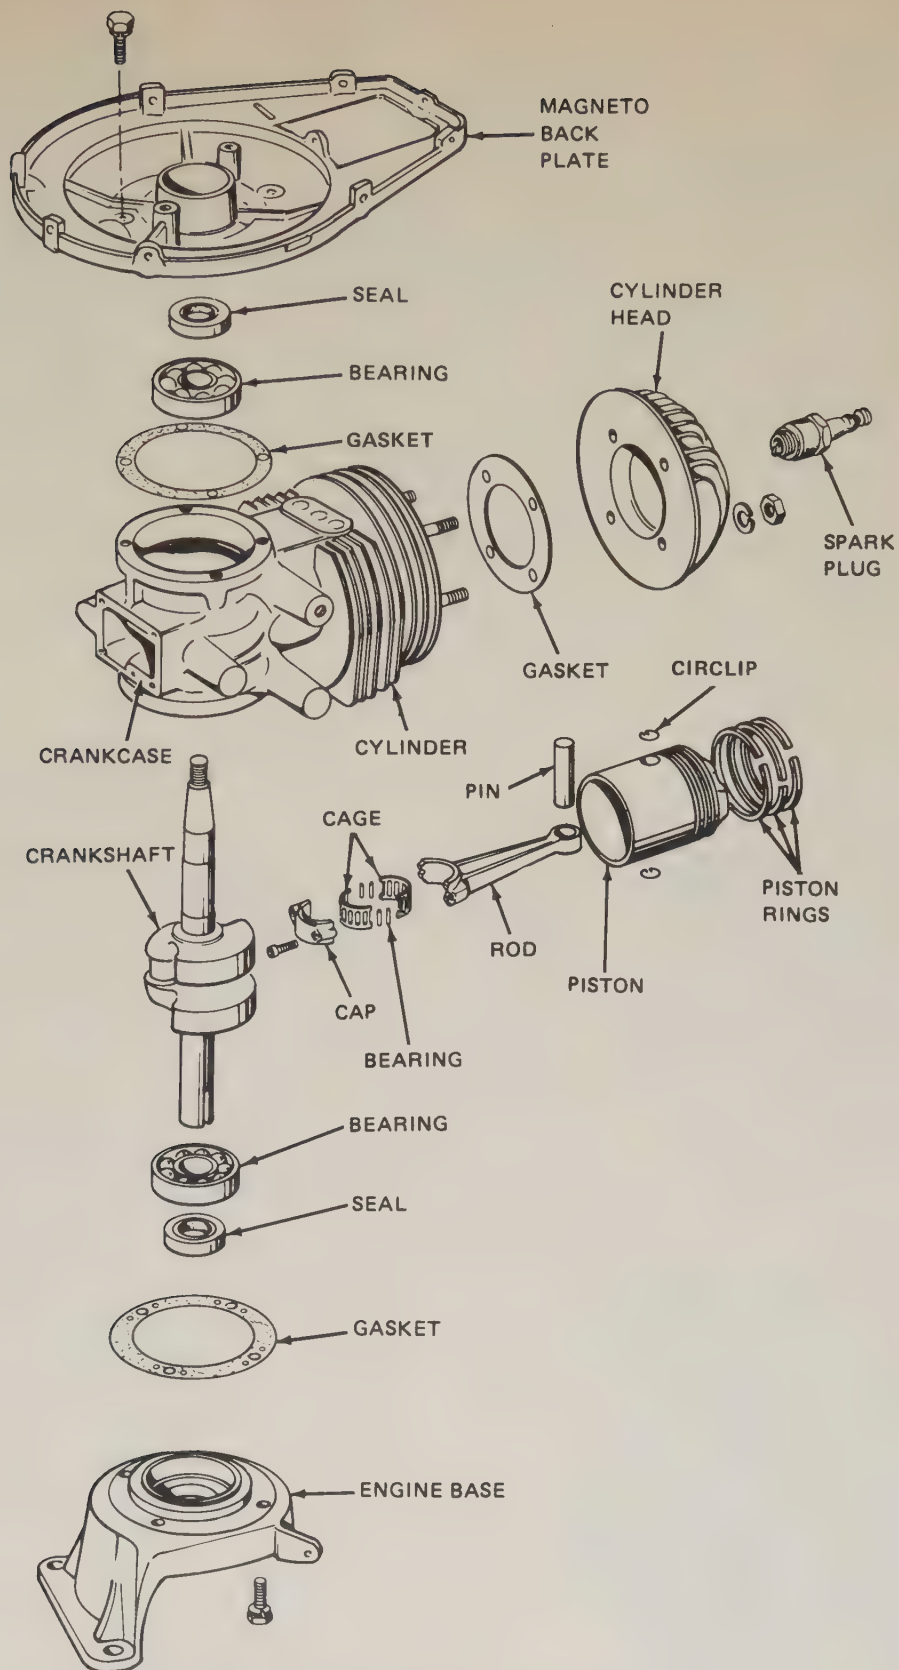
Completely disassembled view of a single-cylinder two-cycle engine. (Jacobsen Manufacturing Company)
